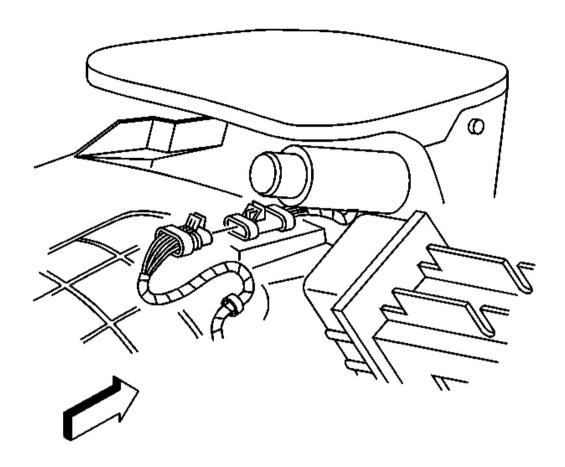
RH Headlamp Wiring Harness Electrical Connector To Forward Lamp Wiring Harness Courtesy of GENERAL MOTORS CORP.
